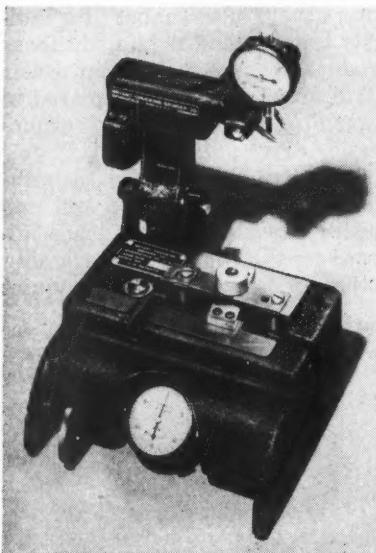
Bryant internal thread gage with attachment for checking squareness of face swung out of operating position
